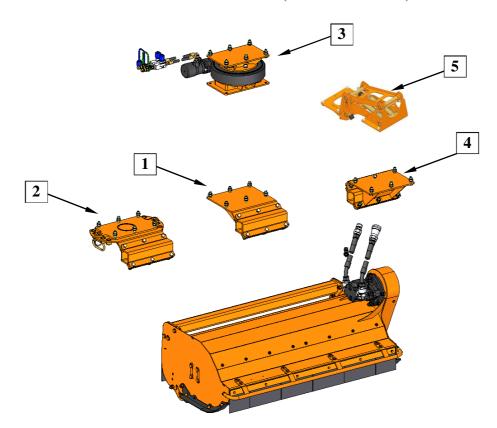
Types of head mountings Lama 121/141 and KW 111/126/141 – 1 - Fixed mounting, 2 – Rotary mounting, 3 – Hydraulic turntable, 4 – Mounting ground following linkage, 5 – Mowing head ground-following linkage
